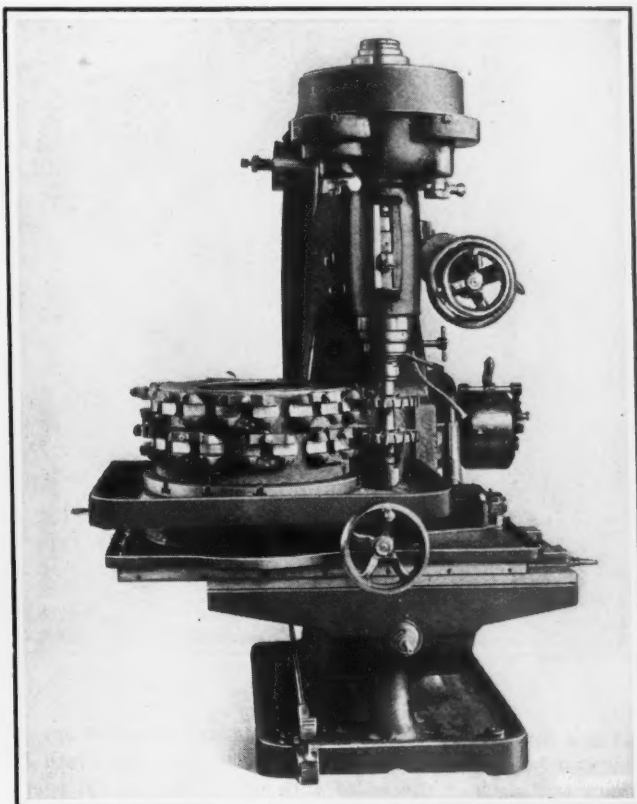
Straddle-milling Yokes, using a Continuous Rotary Milling Fixture
